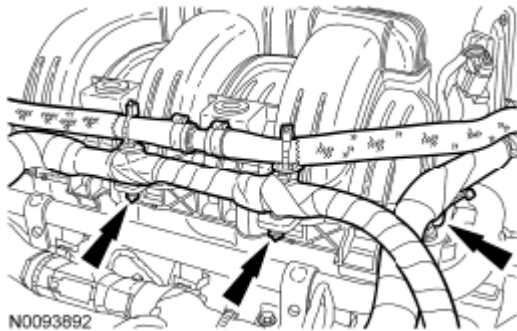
Locating Wiring Harness Retainers To Upper Intake Manifold
